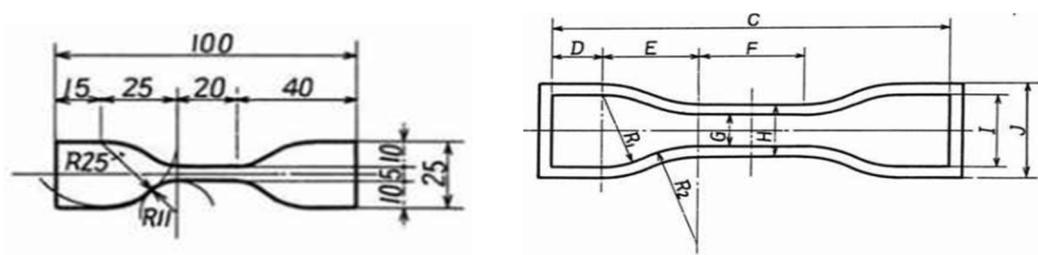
Geometry of tensile specimen (a, left and b, right)
